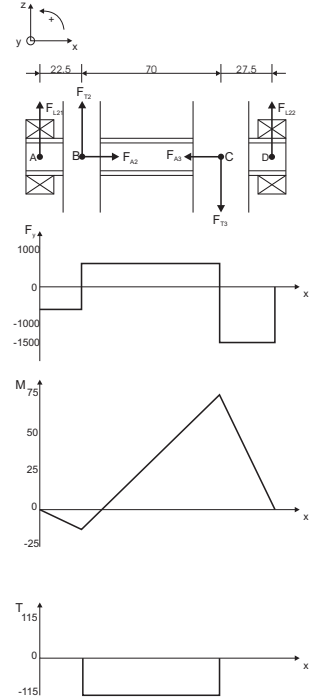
Dimensions, forces, bending moment and torque of the intermediate shaft
